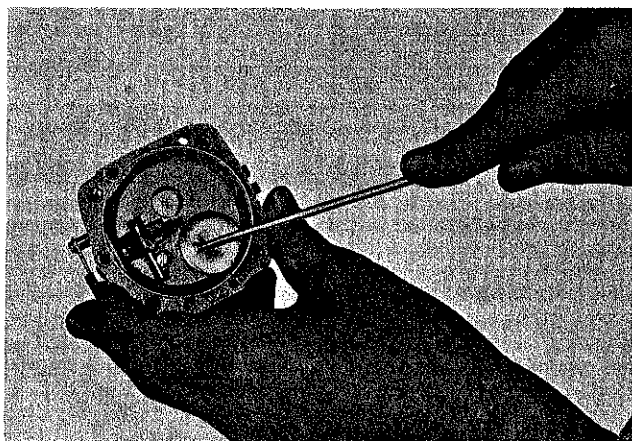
To remove expansion plugs, punch a small hole just through the plug surface and pry it out of the body. Do not insert the punch so deep into the cavity under the plug that the screen is damaged.
